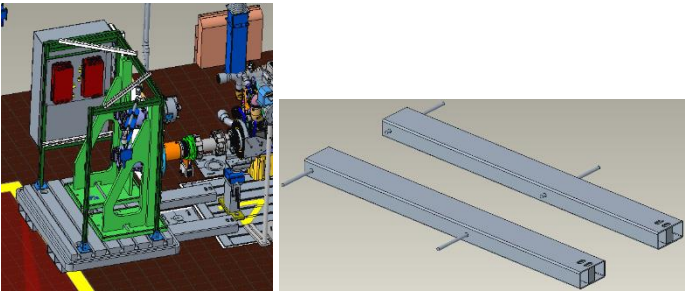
HYBRID COMPONENTS FLOATING BEDPLATE FIXTURED TO MAIN BEDPLATE USING ADAPTER TUBING
